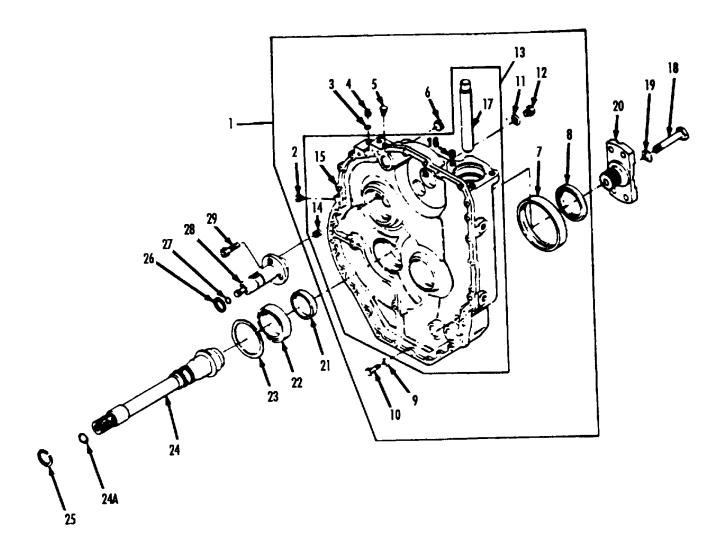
Oil Transfer Diaphragm and Input Pump Drive Gear
